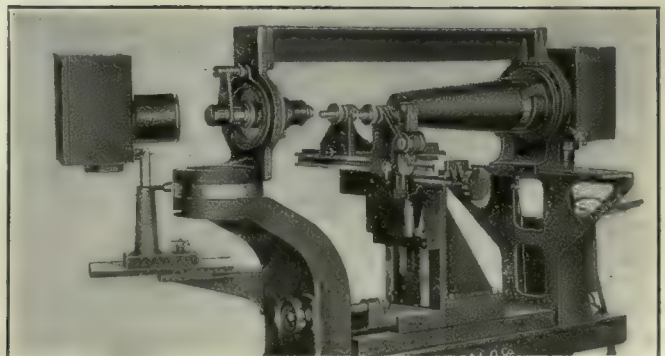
CONTOUR MEASURING PROJECTOR WITH GEAR AND OPAQUE LOW-MAGNIFICATION ATTACHMENTS IN POSITION
